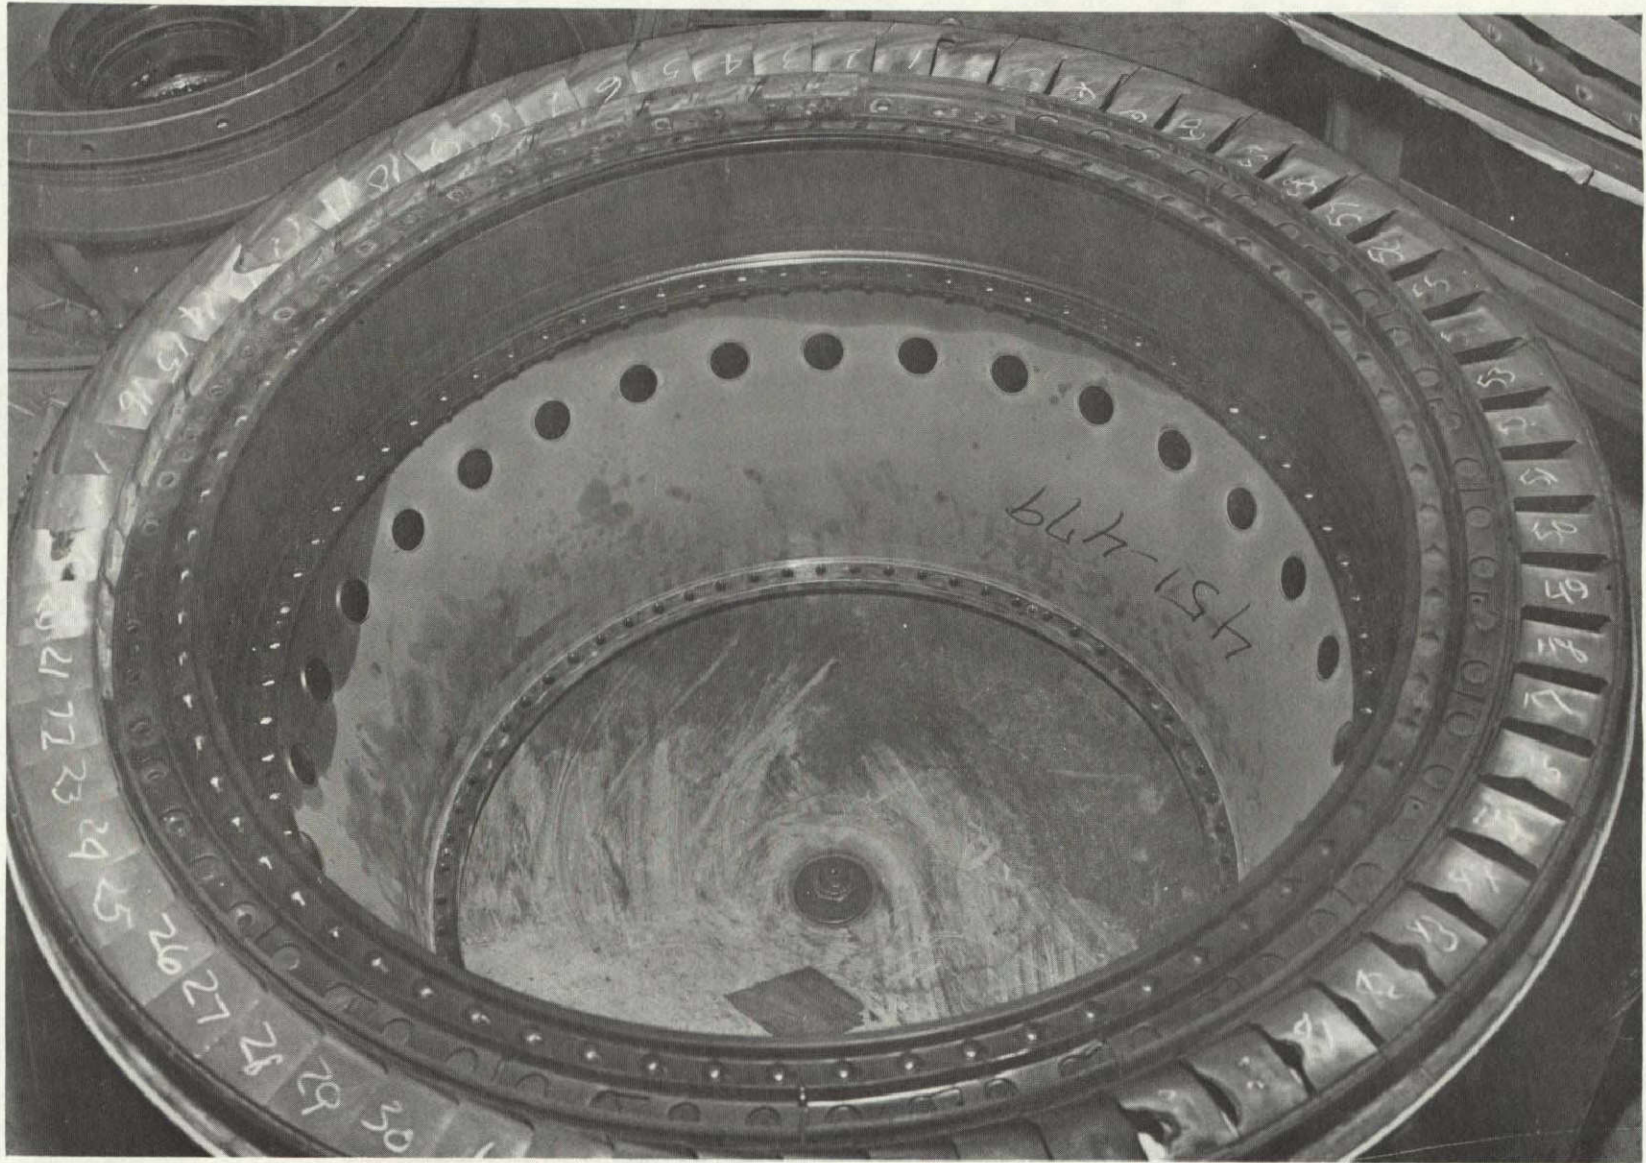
Stage 1 HP Turbine Nozzle Assembly, Aft End, Overall View.
